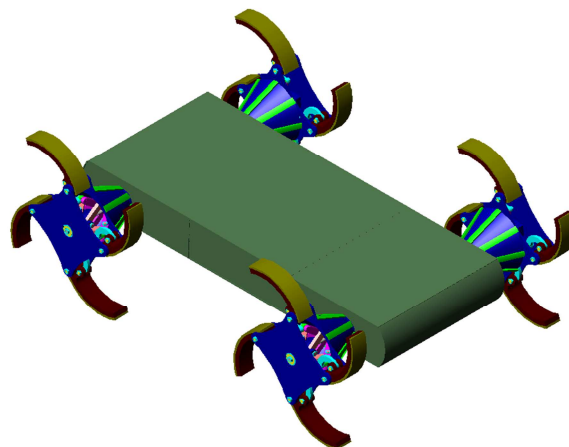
Isometric View of ELAN Robot with four expandable wheels and cover plate while interim position of Expanding Wheel
